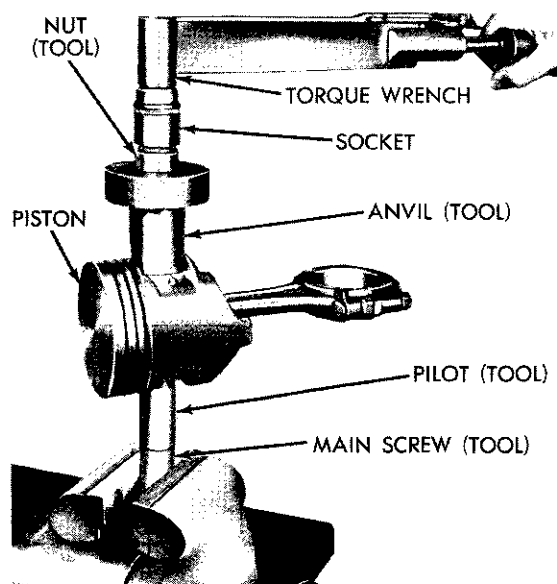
Testing Fit of Piston Pin in Connecting Rod
